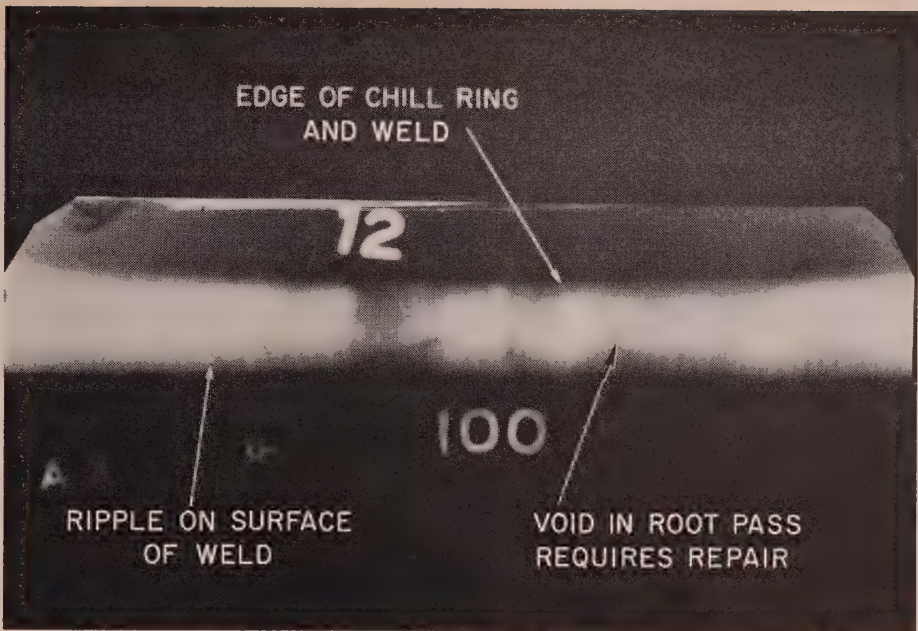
X-ray photograph of a pipe-type cable weld containing a defect.
